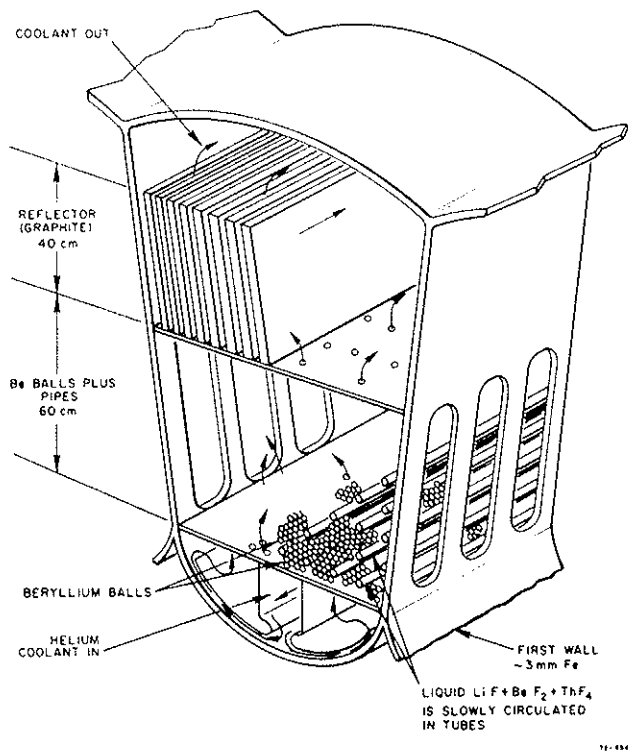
Helium cooled blanket. This blanket will work in either the Tandem Mirror geometry (Fig. 1) or the Tokamak geometry (Fig. 2). This figure also shows the breeding concept using molten salt which slowly circulates in the pipes.
